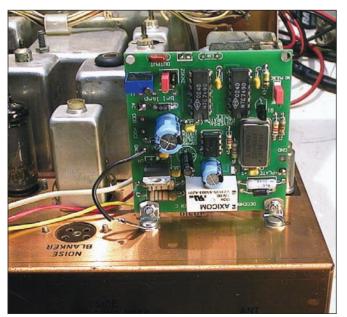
The finished PCB mounted inside the Drake 2C receiver. The PCB mounts to the chassis via the two screws that hold the audio transformer underneath. The TTL oscillator is the large can in the center of the right side of the PCB.
